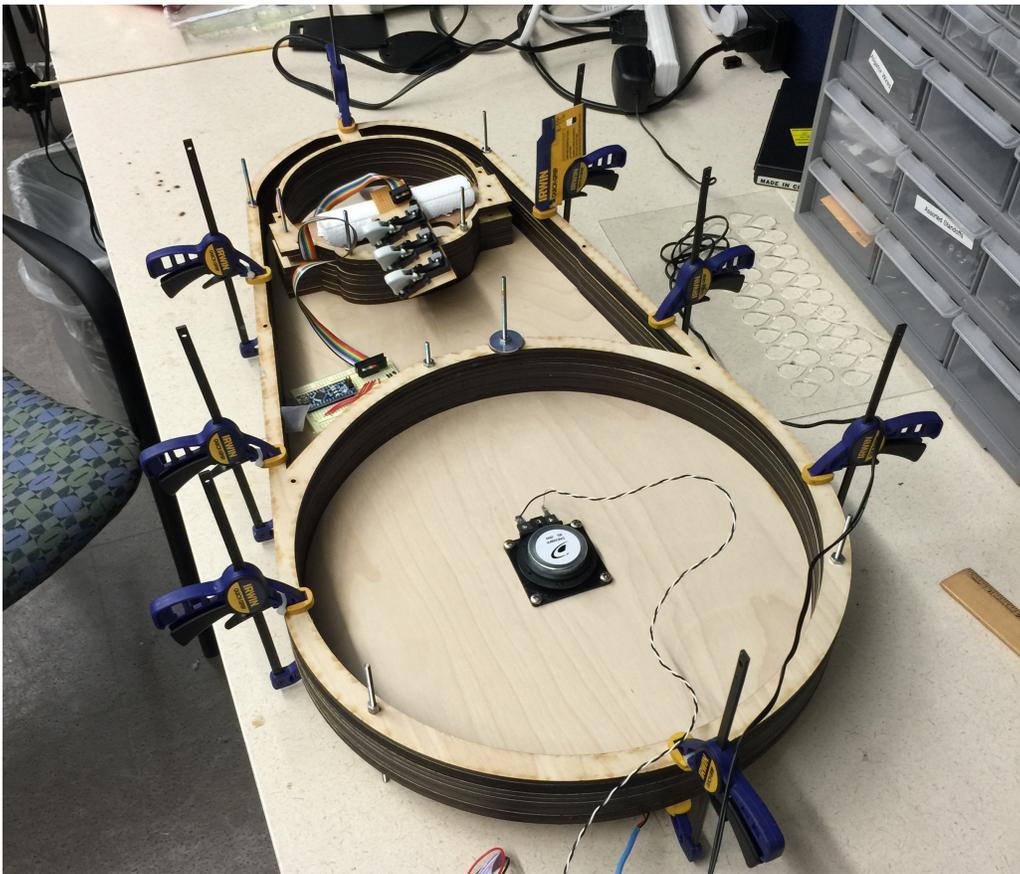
Gluing Layers with Clamps and Metal Guide Rods
